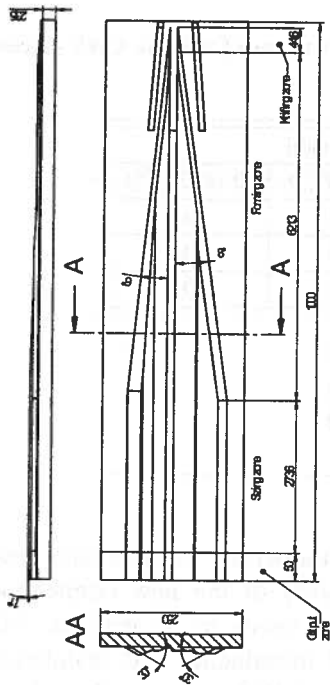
Schema of modified wedge tool for the CWR process of hollowed cutter
